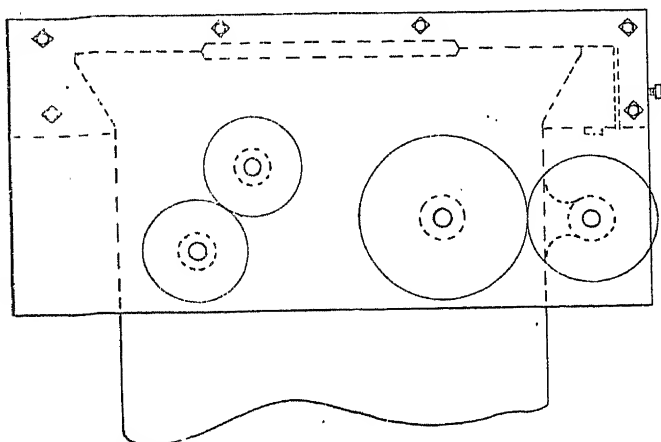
Templet for "marking out" holes in shaping machine bed.
